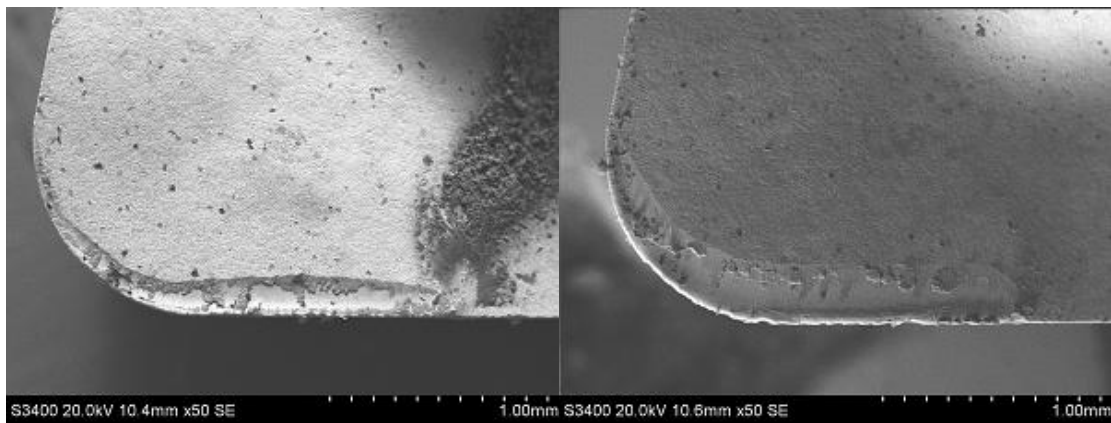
SEM image of tool for a speed of 120m/min and feed is 0.05 mm/rev (left) and 0.15 mm/rev (right) after machining 20 cm<sup>3</sup>
